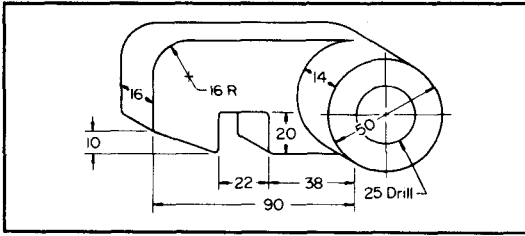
METRIC. Dimensioning pictorial drawings. The descriptions of magnitudes and positions are shown on the pictorial by dimensions placed so as to be easily readable.
